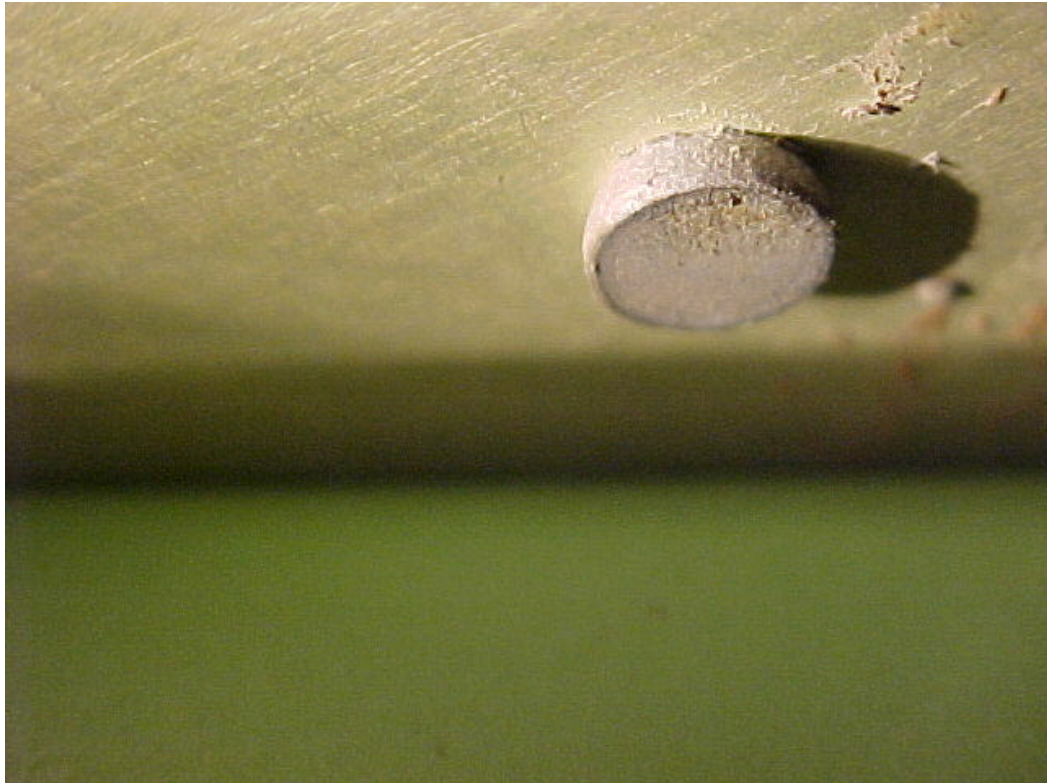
Photograph showing internal detailed visual inspection indication at BS 720, stringer 4R, rivet 12 (panel FT2/F4).
